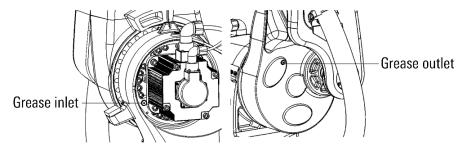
Large load manipulator replacement of J2 axis reducer grease
